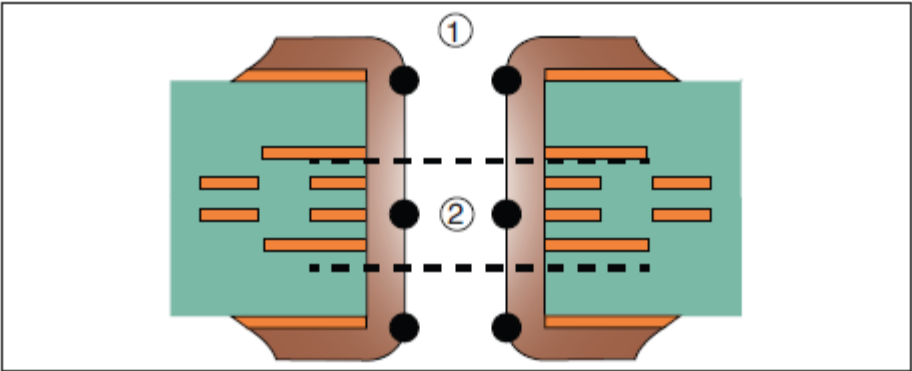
Example Measurement Locations for Hole Copper Plating
